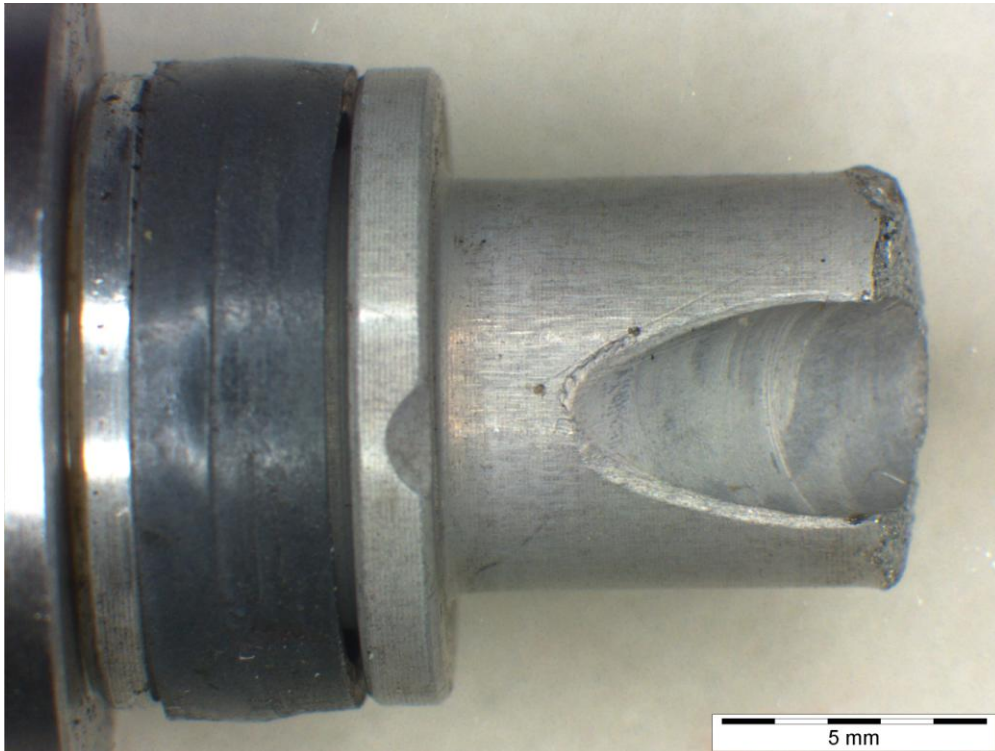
Fracture part B; Top view. The end of the bore is present in this shaft side.
